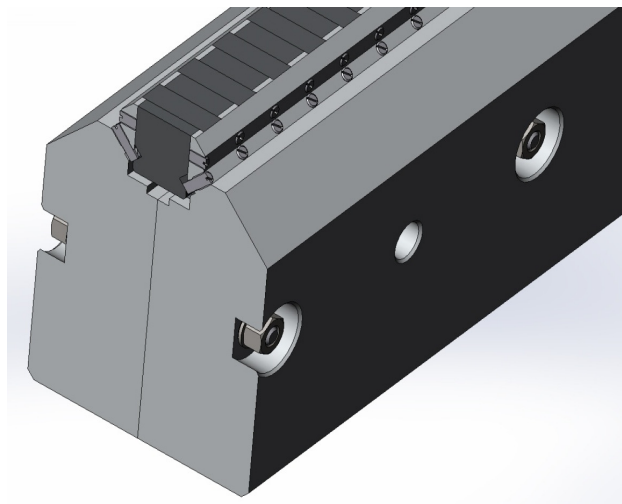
Cassette design. Cassette comprises two precisely machined halves bolted together. The magnets are inserted after cassette assembly and are hold in place with adjusting and fixing screws made of the stainless steel.
